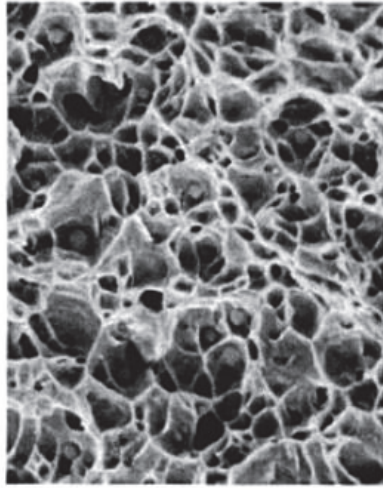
Examples of SEM image of fractured surface ¹⁻⁴²⁾
